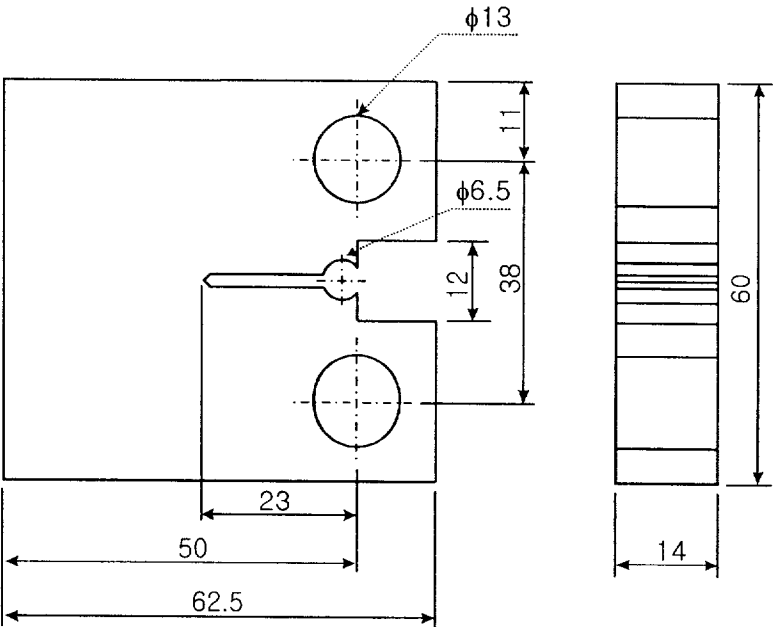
Dimensions of fatigue specimen (unit : mm).
